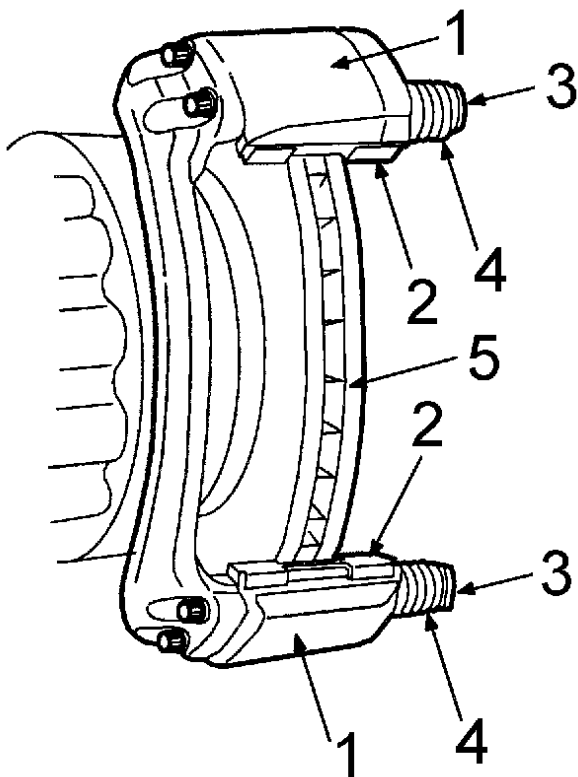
Inspect Anchor Plate, Slippers, Guide Pin Heads, Guide Pin Boots and Rotor
